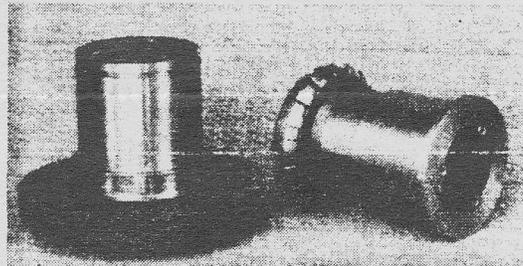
Shaft couplings made from Vega crankshaft hub (left) and solid steel (right) for Mazda.
